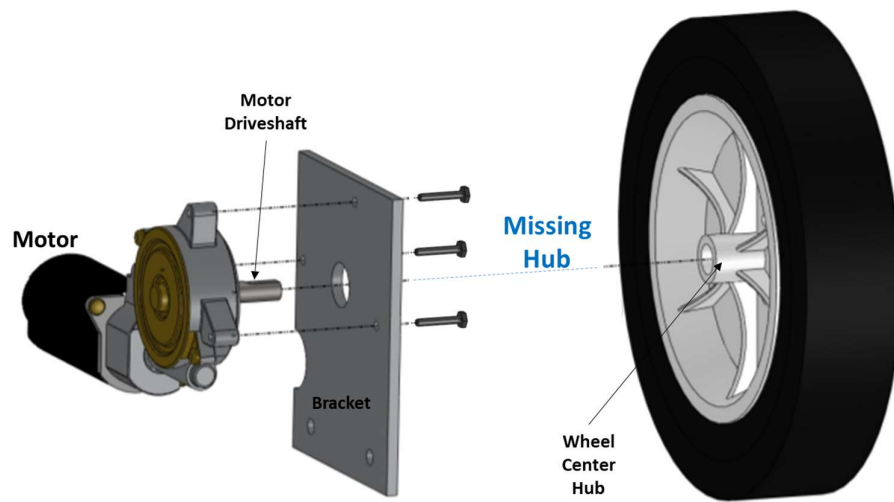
Exploded View of Drive Motor/Hub/Wheel Assembly
